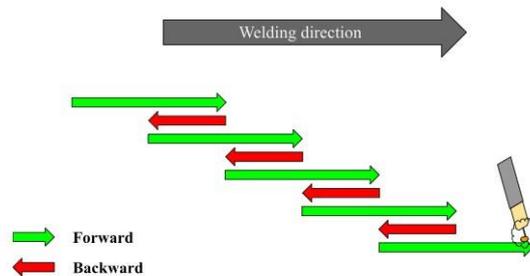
Weld bead layer deposition using the switchback technique.
